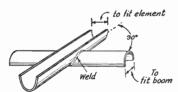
The clamp for the driven element is made by splitting 1-foot lengths of iron pipe and welding them as shown.
